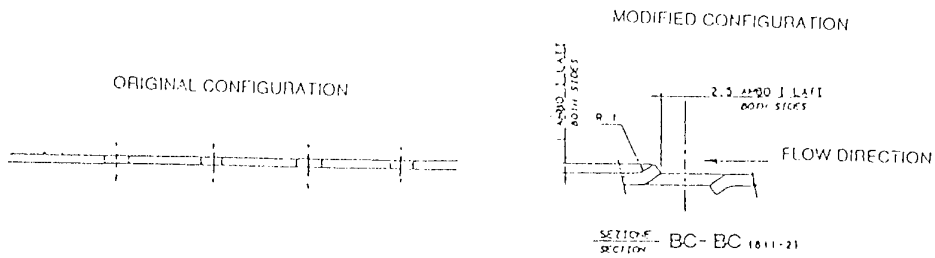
Screech Damper : Modification of Damping Hole Geometry
